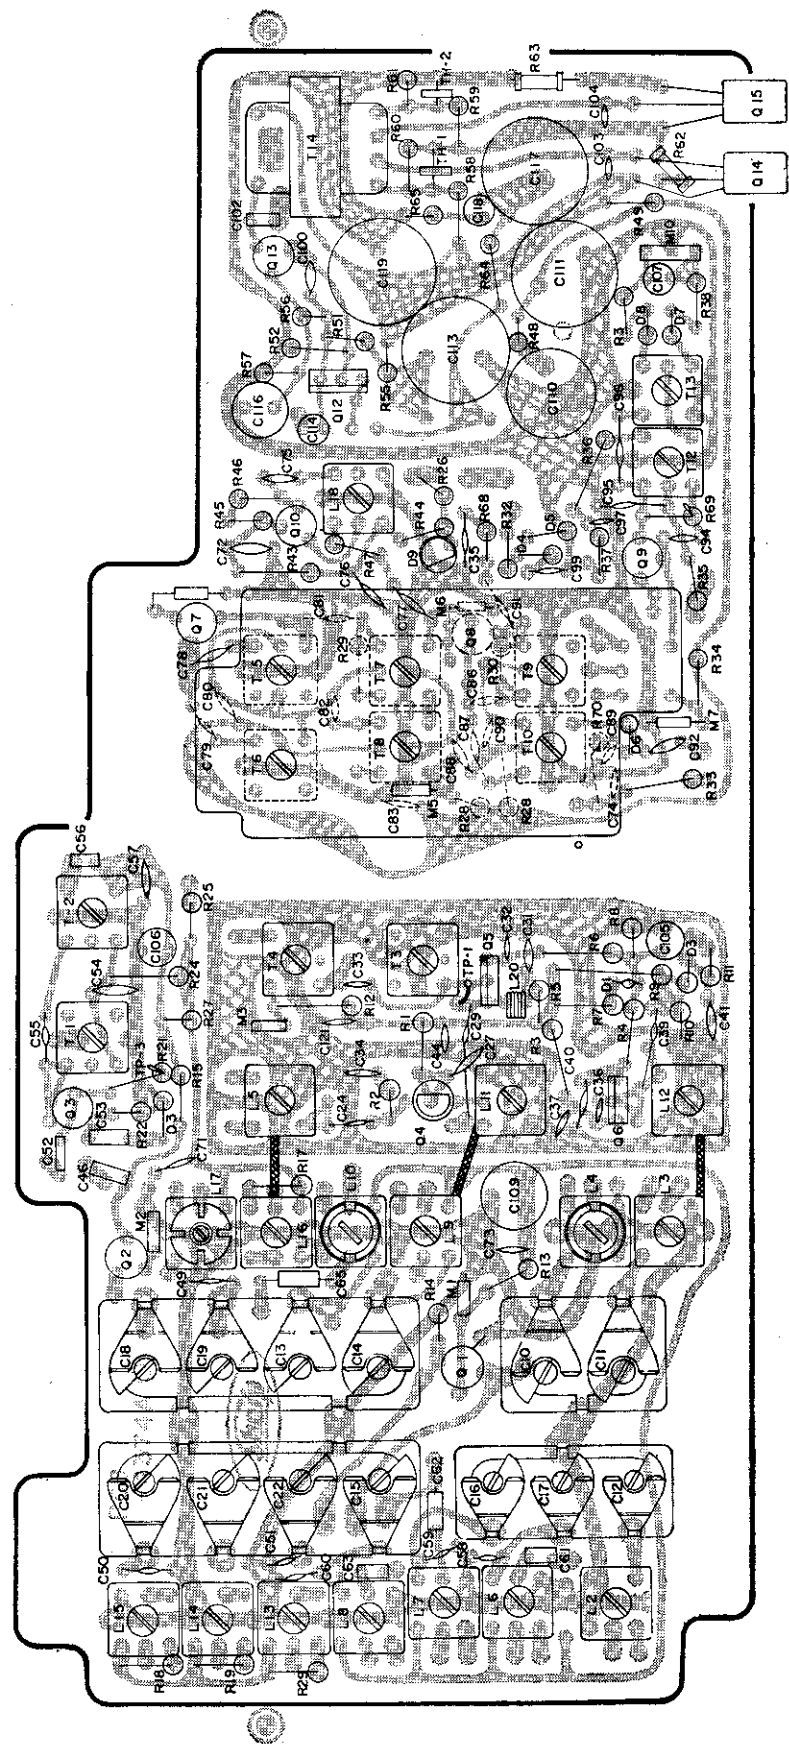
COMPONENT SIDE OF AUDIO BOARD
